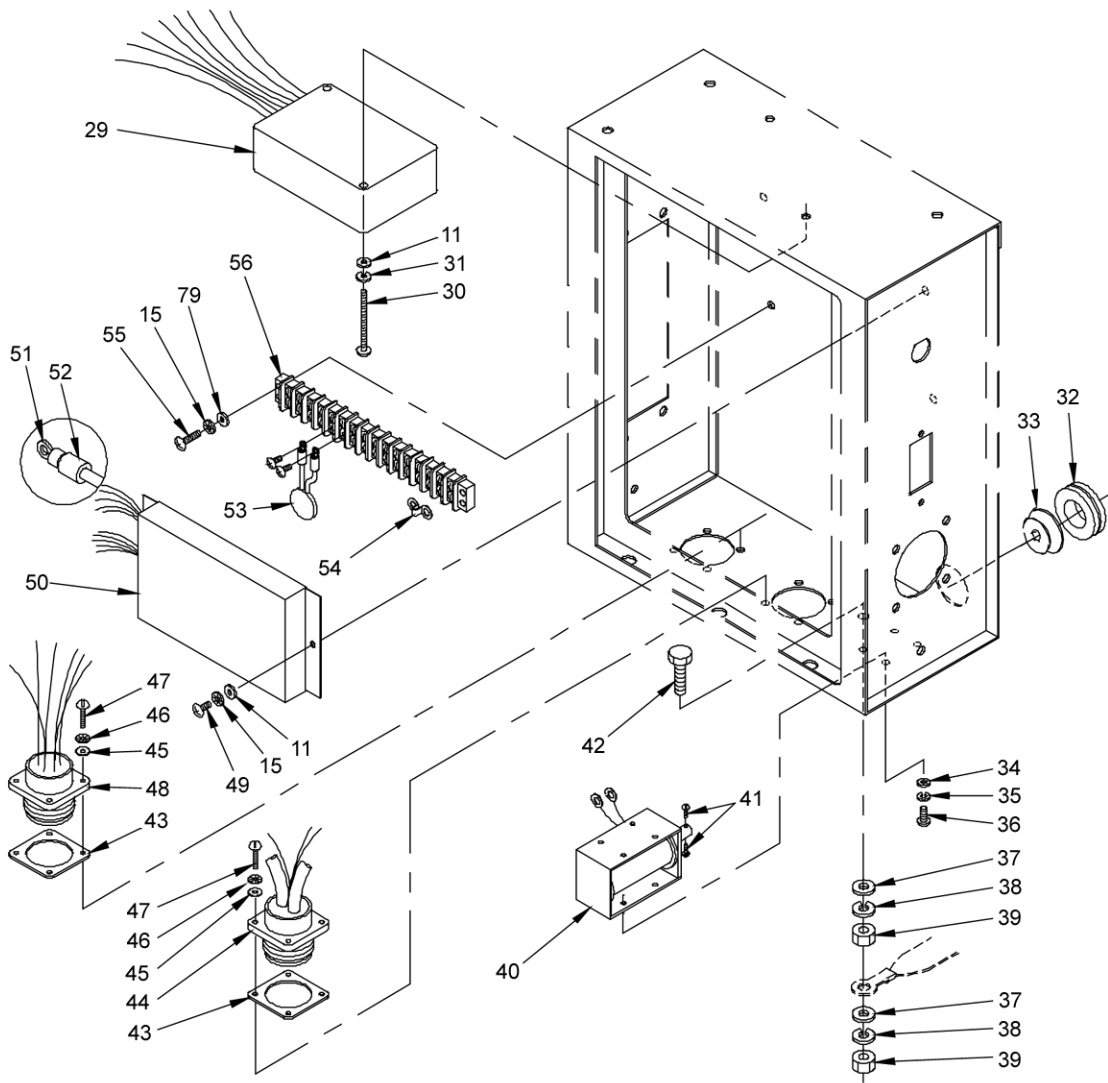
Control Panel Assembly (MEP-531A) (Sheet 2 of 3).
